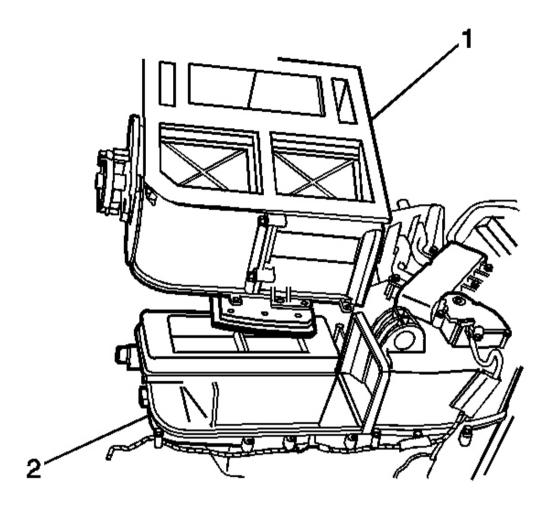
Air Distribution Housing And HVAC Module Assembly Courtesy of GENERAL MOTORS CORP.
